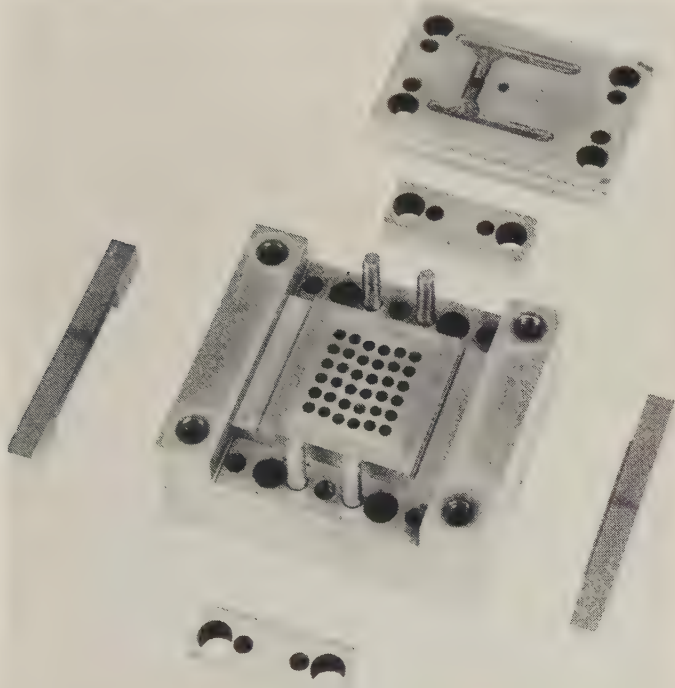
Die with pins retracted, side pieces removed, and finished transfluxor platen removed.
